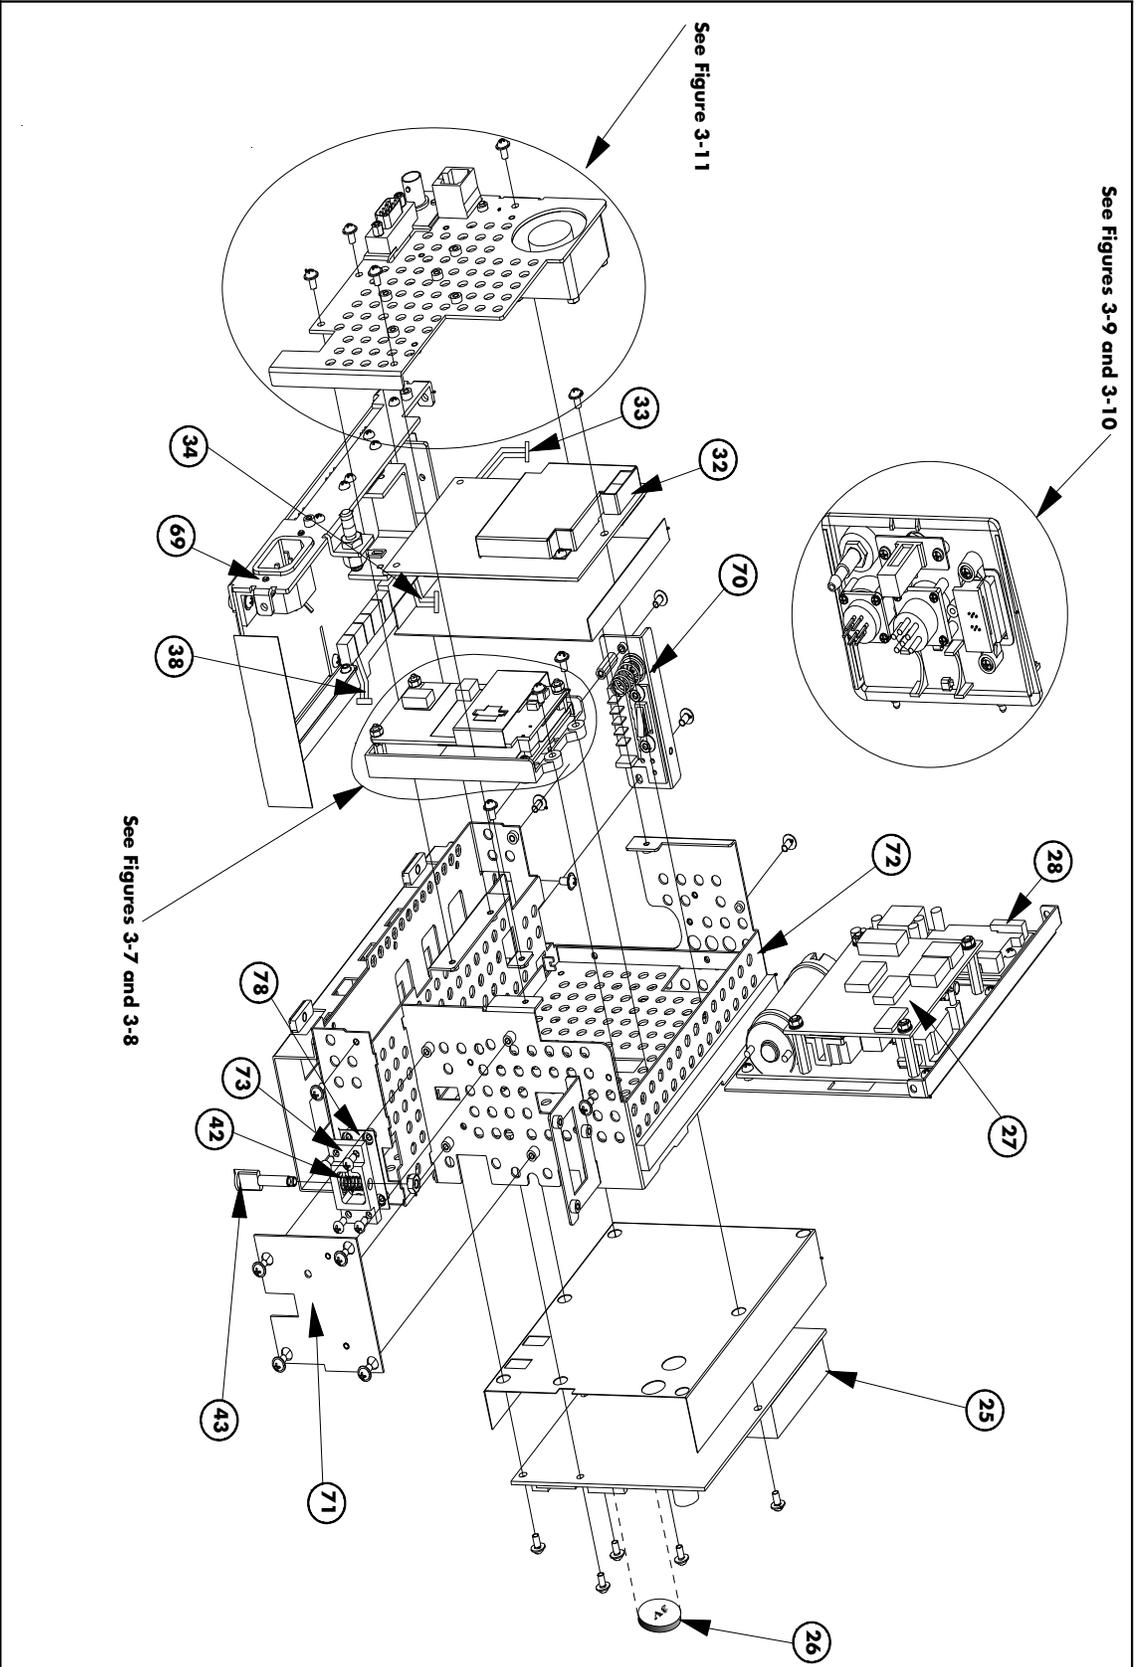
Main Chassis Sub-Assembly (Li Ion)
